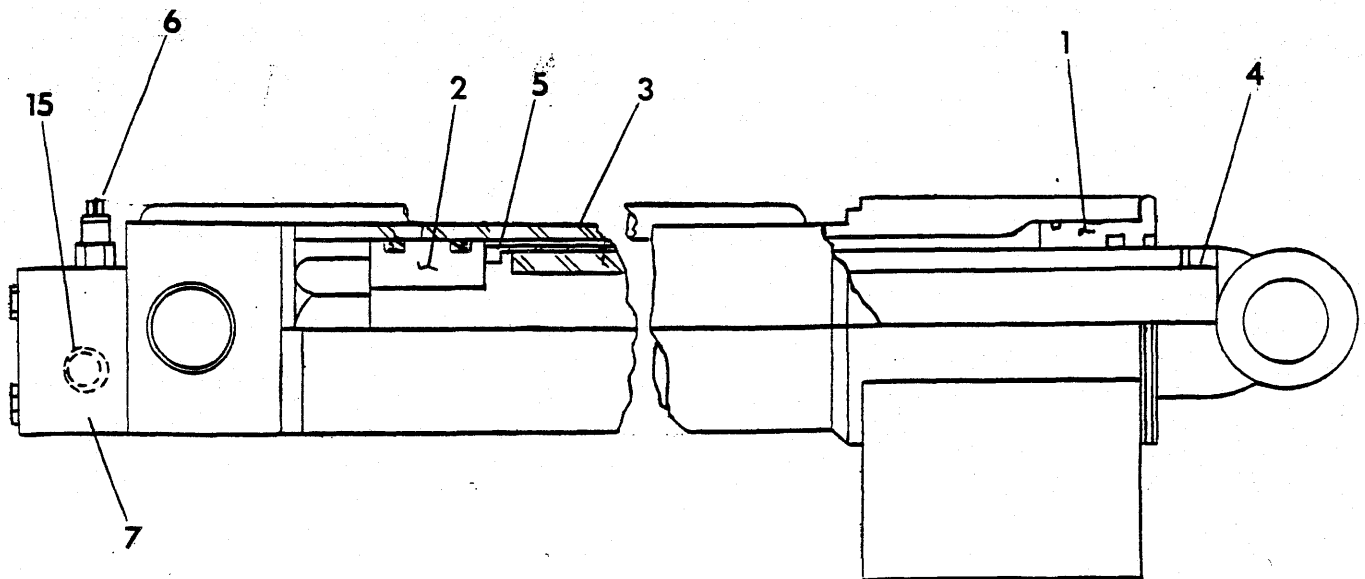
B BOOM EXTENSION ASSEMBLY (58)
